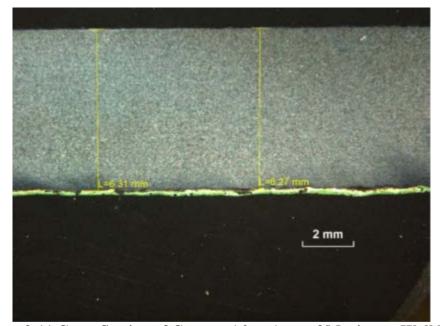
Cross Section of Coupon A2 at Area of Maximum Wall Loss
